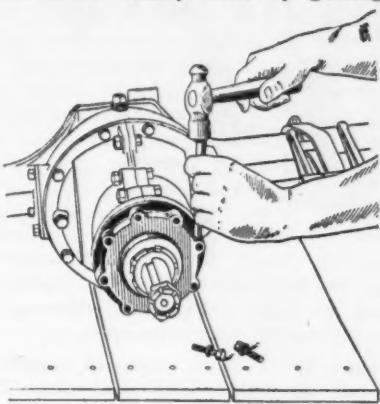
Adjustment of bevel pinion. Tapping the ring in right hand rotation backs bevel pinion out and into looser mesh with bevel gear
